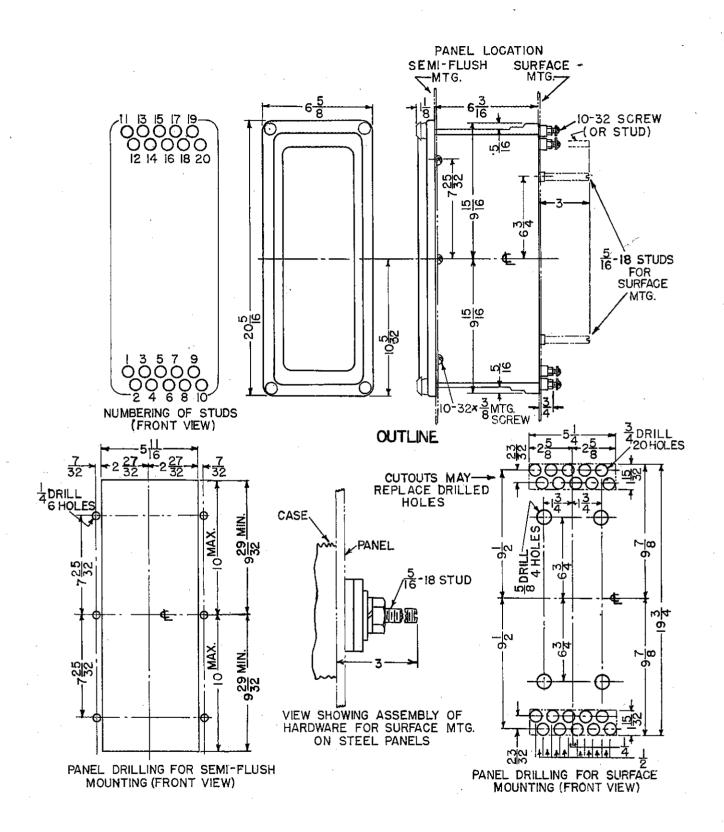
Outline and Panel Drilling for Type GESIIF Relay
